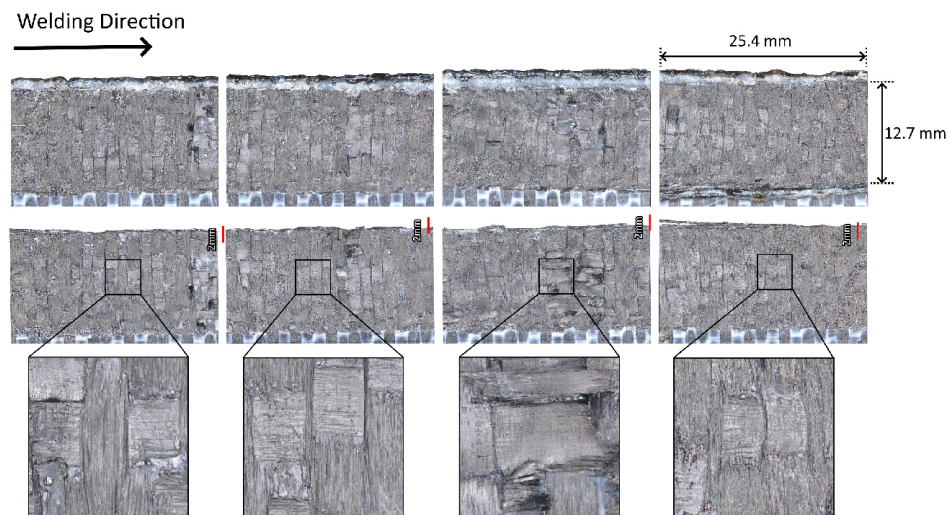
Fracture surface of specimens that were continuously welded without consolidator; Vibration amplitude (peak-to-peak): 80 μ m, welding force: 500 N, welding speed: 35 mm/s
